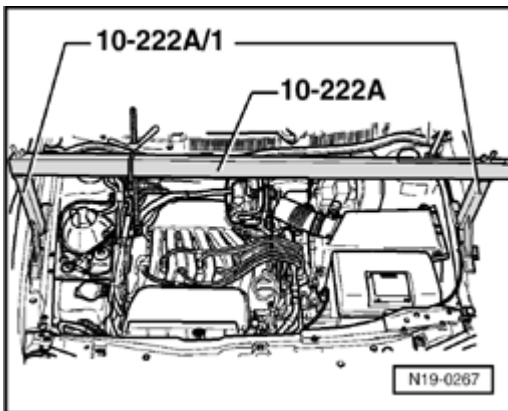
Engine Support Bridge 10 - 222 A With Bracket For Engine 10 - 222 A /1 Installed
